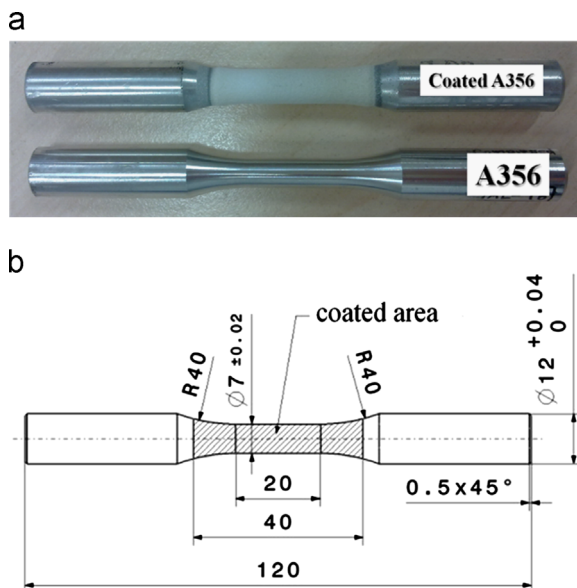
Dimension of TMF/LCF test specimens and the location of coating.
